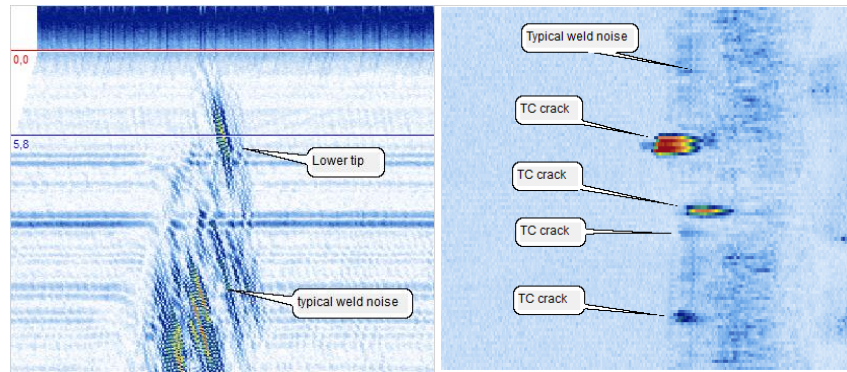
Typical ultrasonic echo from the in-situ produced thermal fatigue cracks, side and top view
